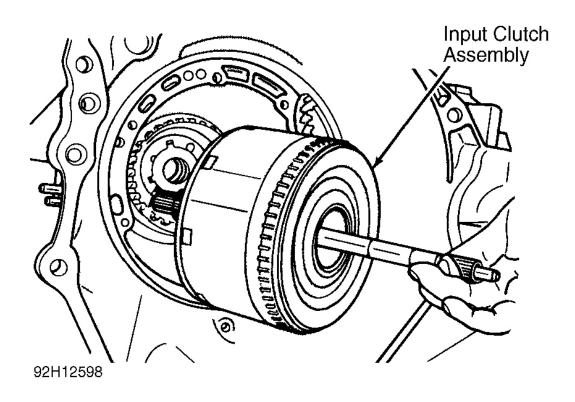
Removing Input Clutch Assembly Courtesy of CHRYSLER CORP.
